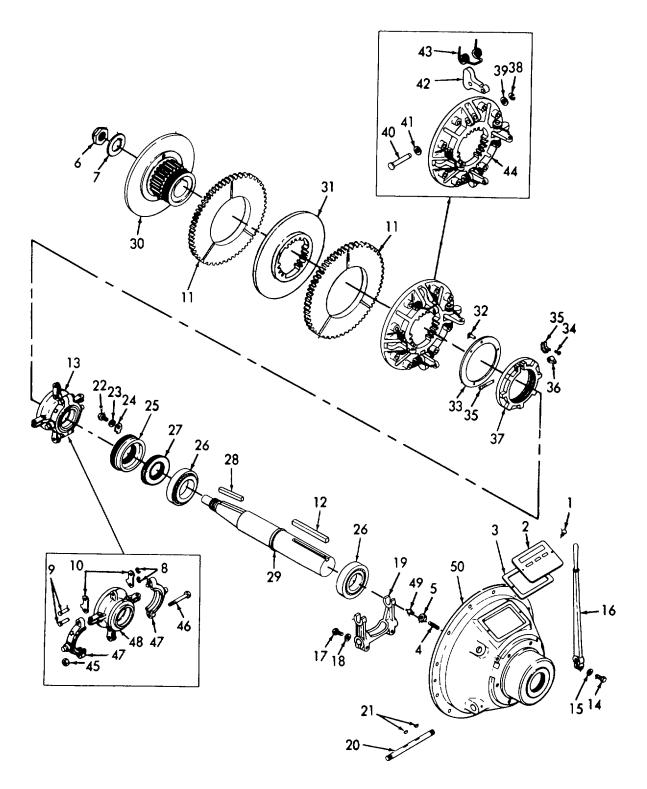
Clutch Repair, Disassembly/Reassembly.
